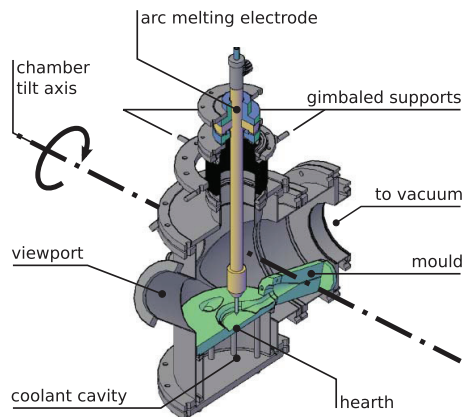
(Color online) Cutout view showing the design of the vacuum chamber.
